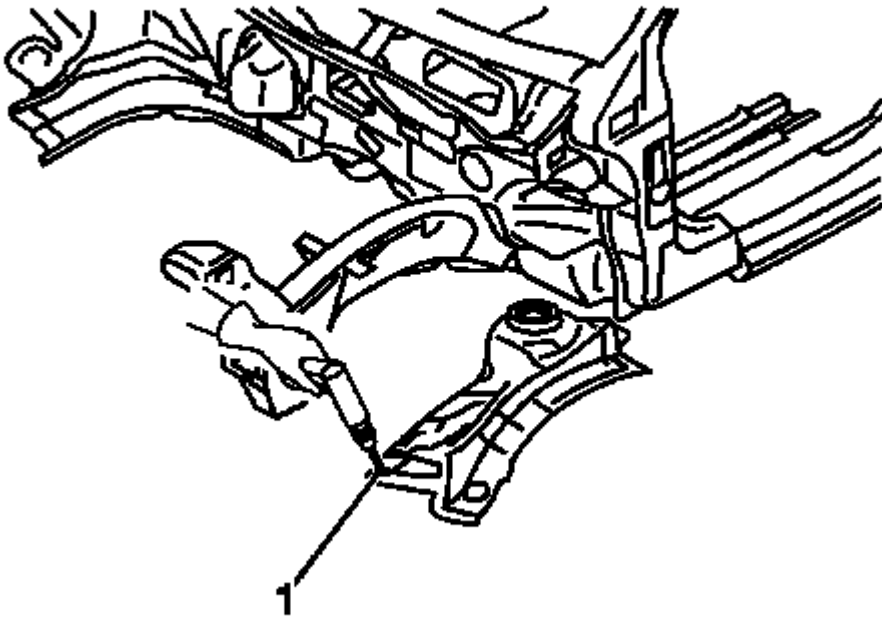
Drilling Holes In New Front Wheelhouse For Welding
